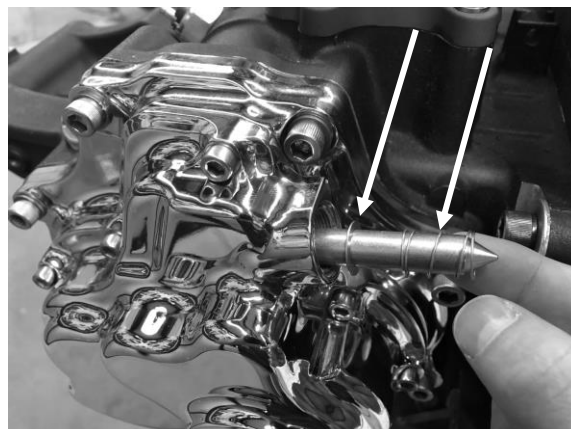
| REVERSE SPRING SEAT WASHER AND SPRING INSTALLATION; WASHER FIRST – THEN SPRING
